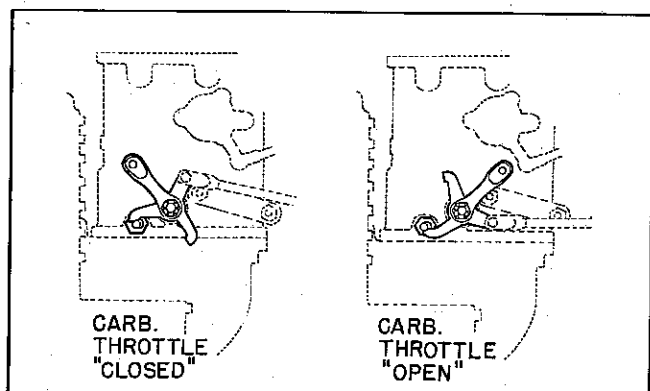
Positions of Carburetor Throttle Lever with Throttle Closed and Open.
